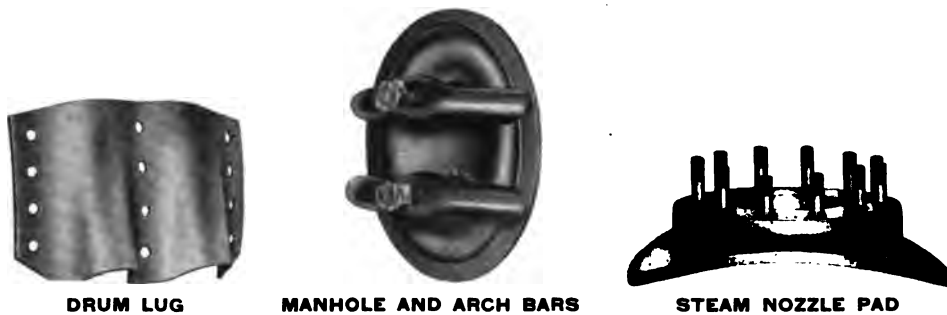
FORGED STEEL DETAILS OF THE STIRLING BOILER
